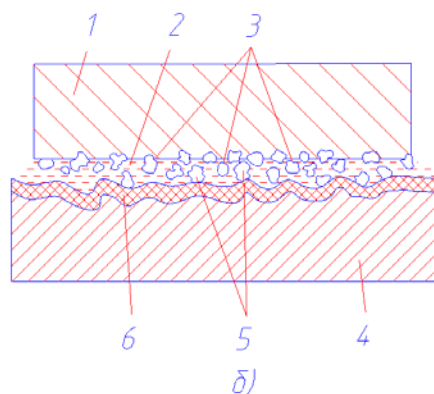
The smooth grinding with the help of GOI polishing paste; 1 – abrading tool; 2 – soft ingredients of the paste; 3 – hard ingredients of the paste; 4 – work part; 5 – grains that removed material coat; 6 – sulfide film
